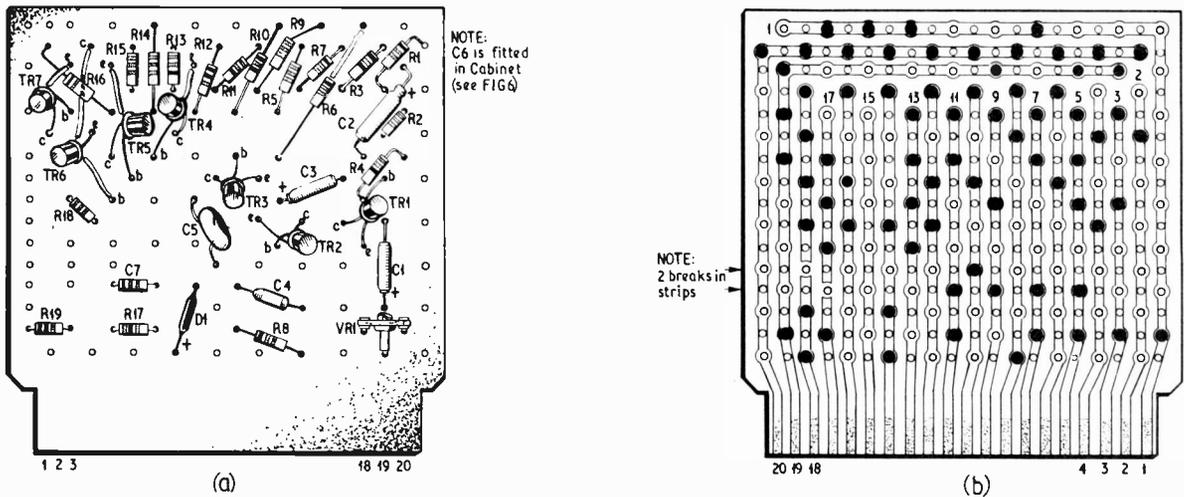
Printed wiring board. (a) shows arrangement of circuit components, (b) shows underside of board and indicates where the metal strips are broken
